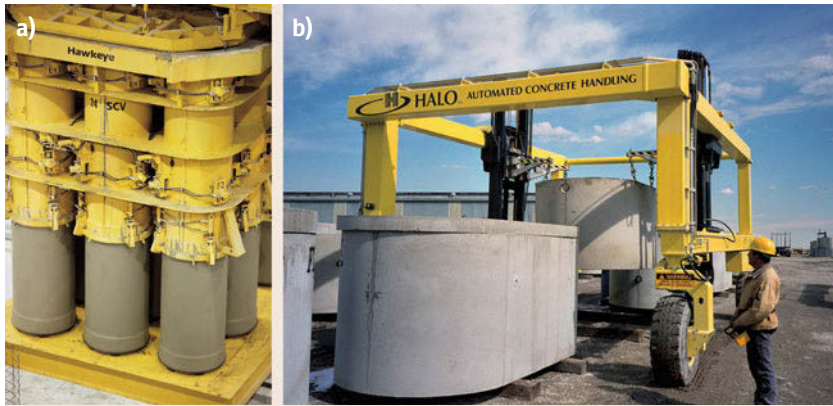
(a) Automated concrete pipe manufacturing machines (courtesy Hawkeye Group USA); (b) precast concrete handling robot (courtesy Halo, Inc.)
